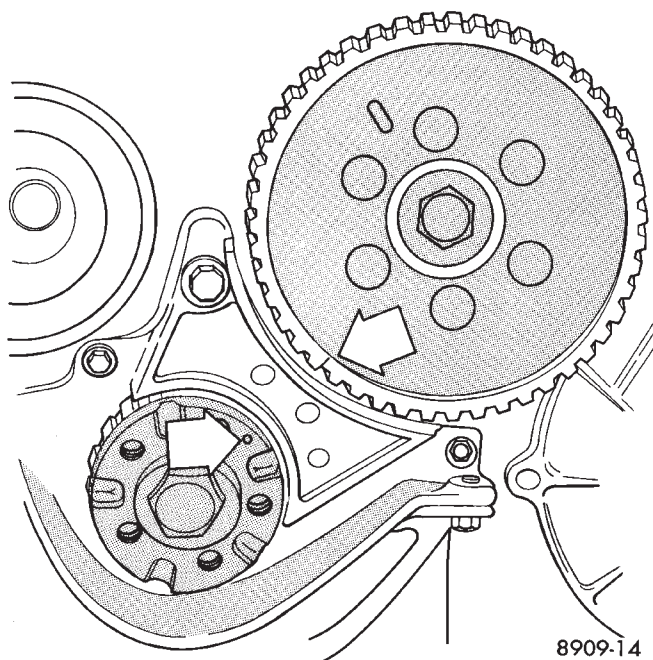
Removing Crankshaft, Intermediate Shaft and Camshaft Oil Seal
